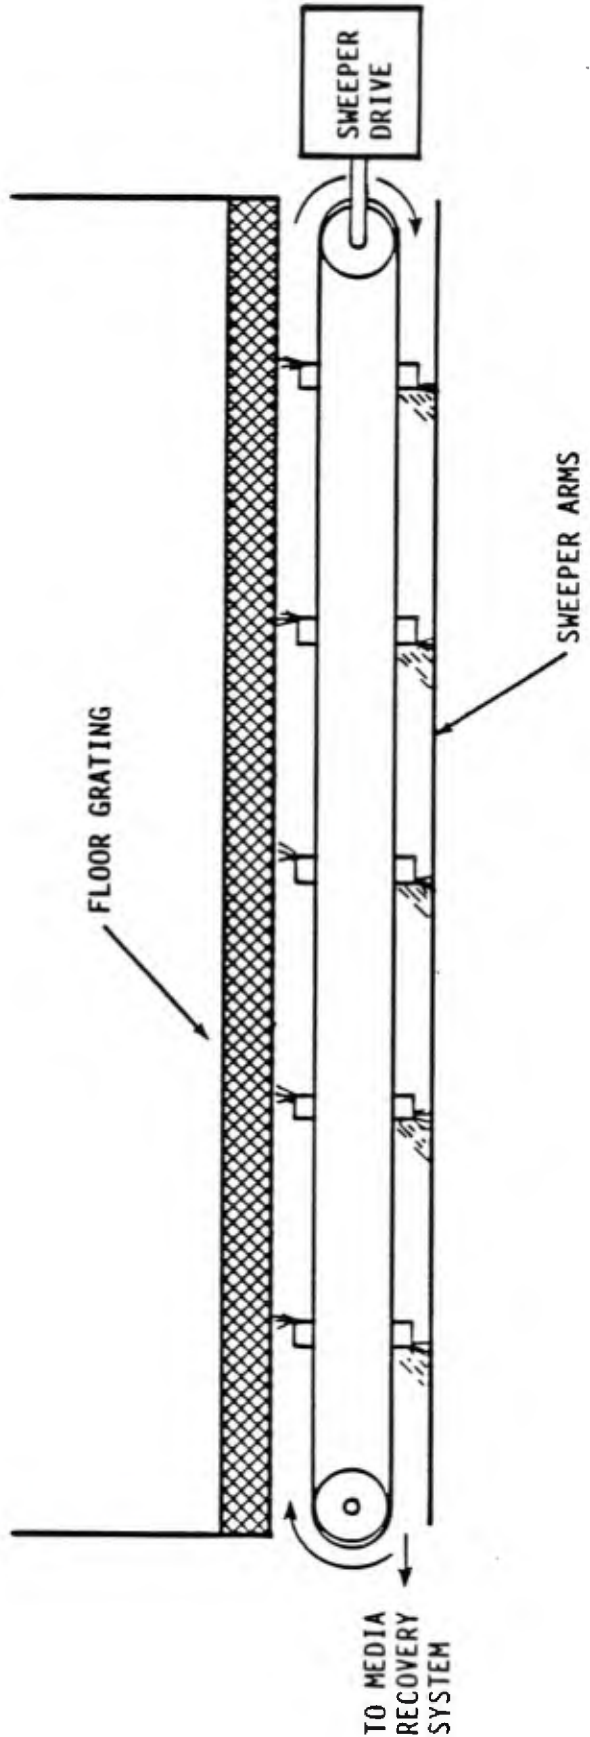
TRAVELING SWEEPER ARMS FLOOR RECOVERY SYSTEM.
